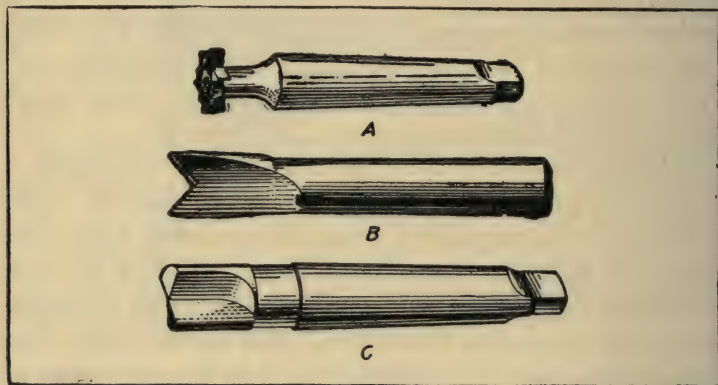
(A) TEE-SLOT CUTTER. (B) FISHTAIL CUTTER
